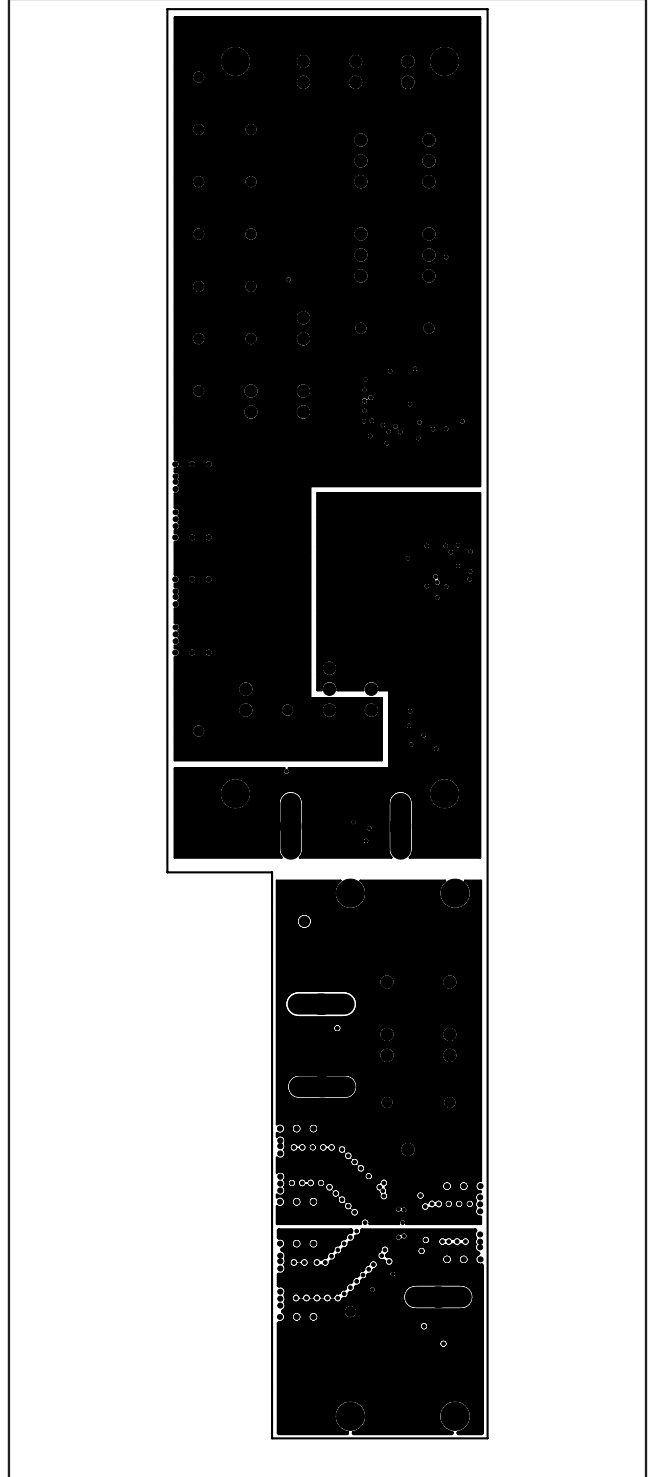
MAX3975 EV Kit PCB Layout—Power Plane
